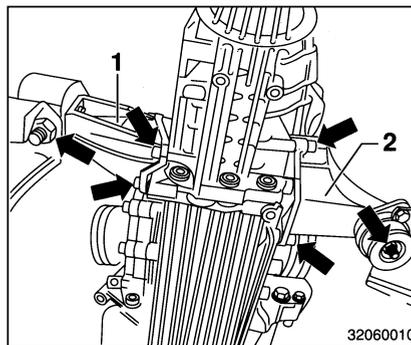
Right-hand and left-hand gearbox supports 1 Left-hand gearbox support - 2 Right-hand gearbox support
